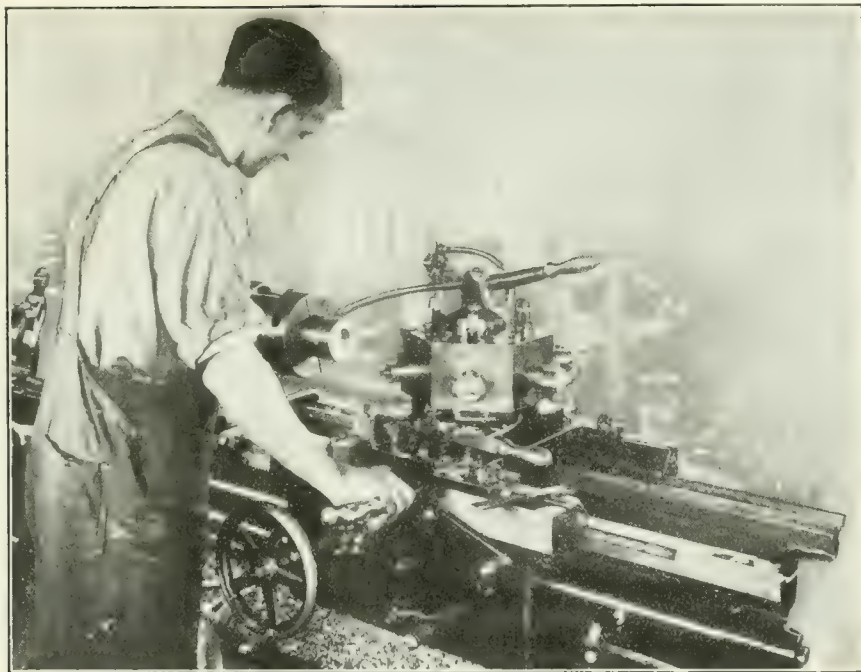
FINISHING BASE OF HIGH EXPLOSIVE SHELLS ON "McDOUGALL" LATHE FITTED WITH TURRET HEAD.
